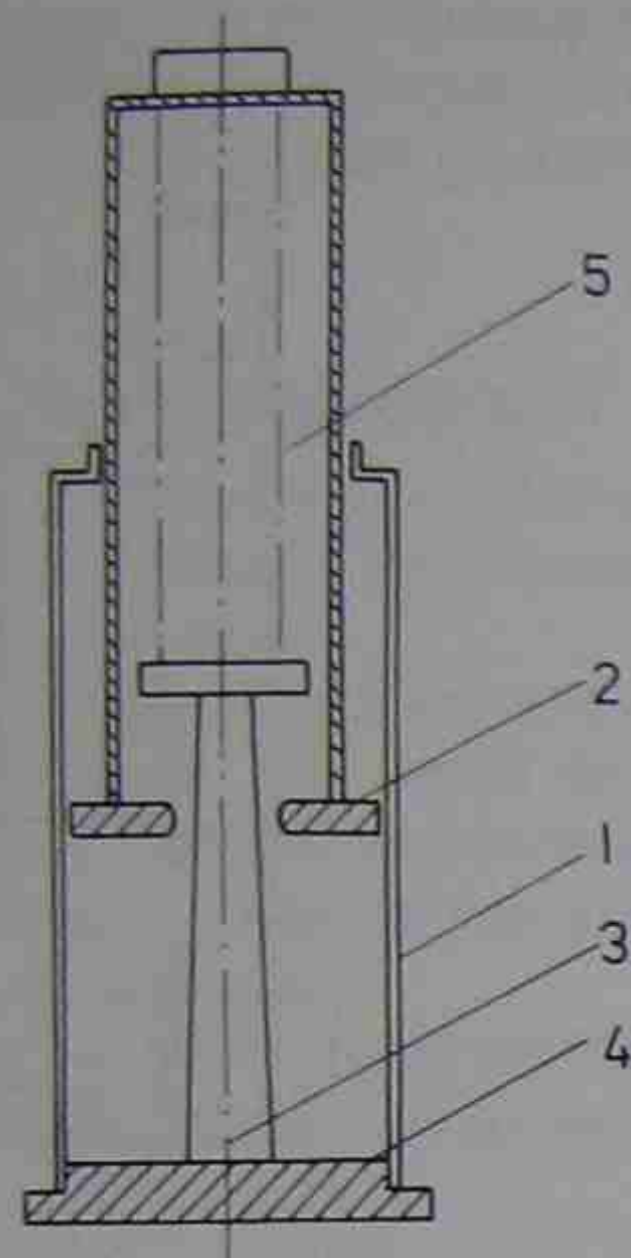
Oil buffer with tapered steel pin and annular orifice.
